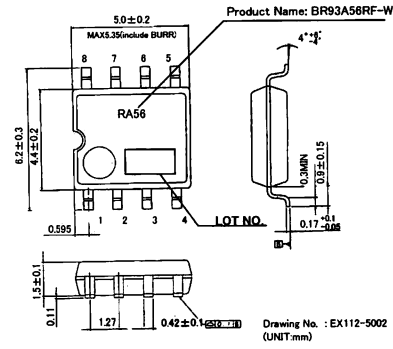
(b) PHYSICAL DIMENSION SOP8 (BR93A56RF-W)
